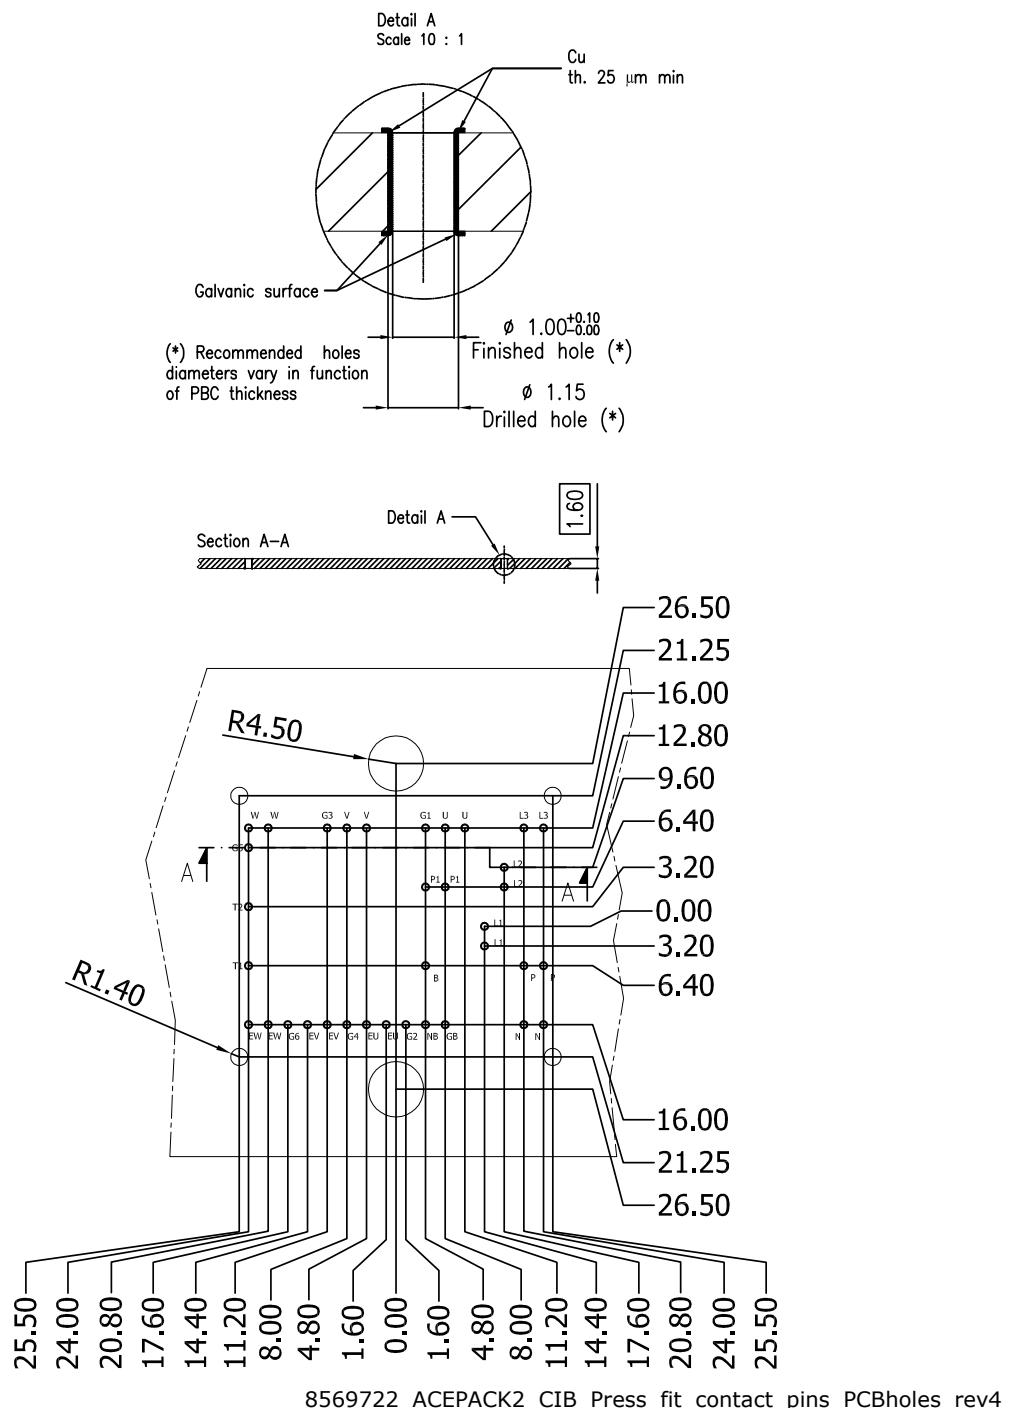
ACEPACK™ 2 CIB press fit contact pins package outline (dimensions are in mm)
